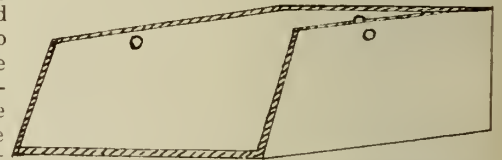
PROSPECTIVE VIEW OF DRAW-BACK.
